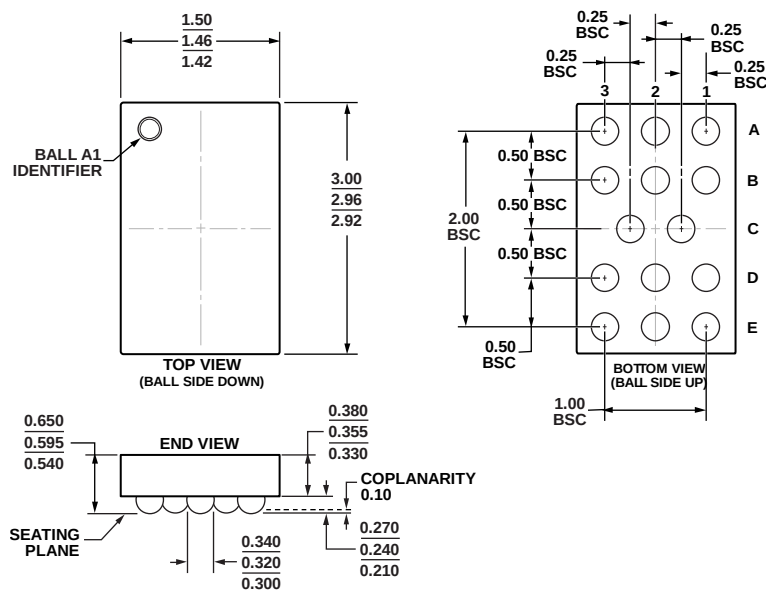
14-Ball Wafer Level Chip Scale Package [WLCSP]
